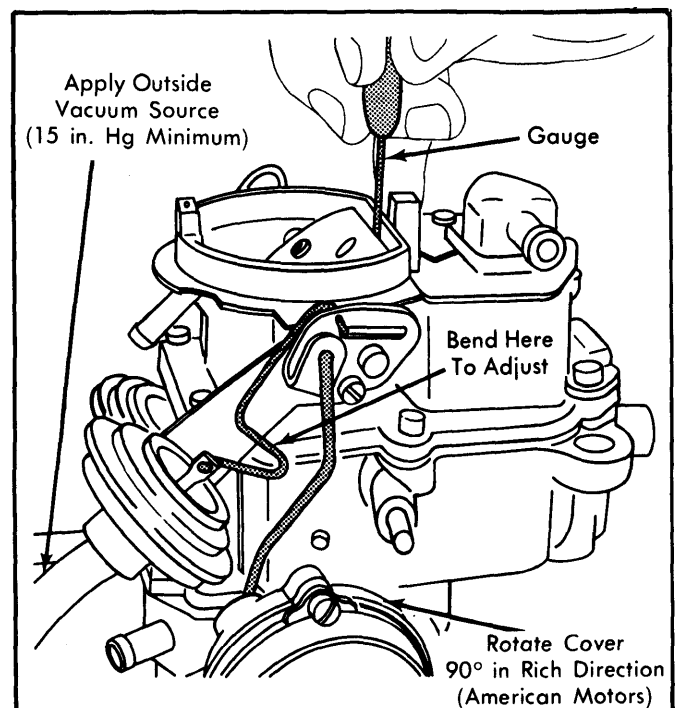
Adjusting Choke Vacuum Break (Initial Choke Valve Clearance)
